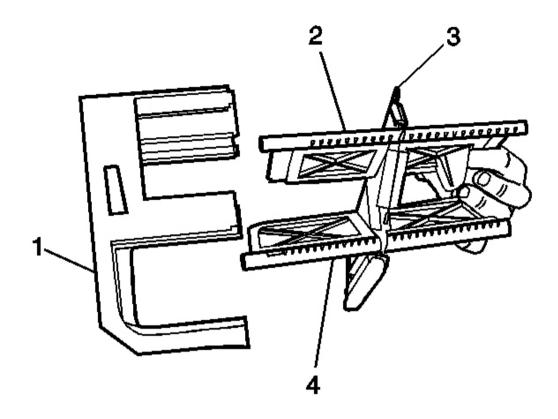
Upper Mode Door & Door Assembly Courtesy of GENERAL MOTORS CORP.
